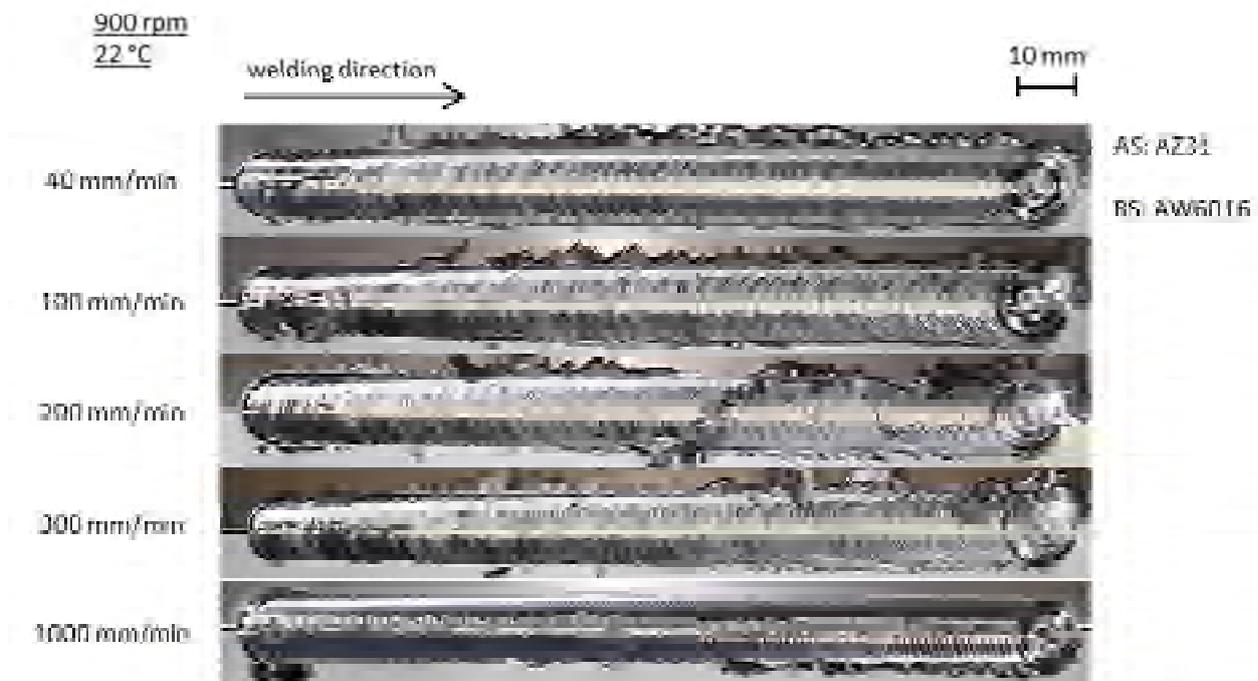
surface appearance for FSW of extruded AZ31/AW6016 for different welding speeds at a constant rotational speed of 900 rpm and 22 °C.
